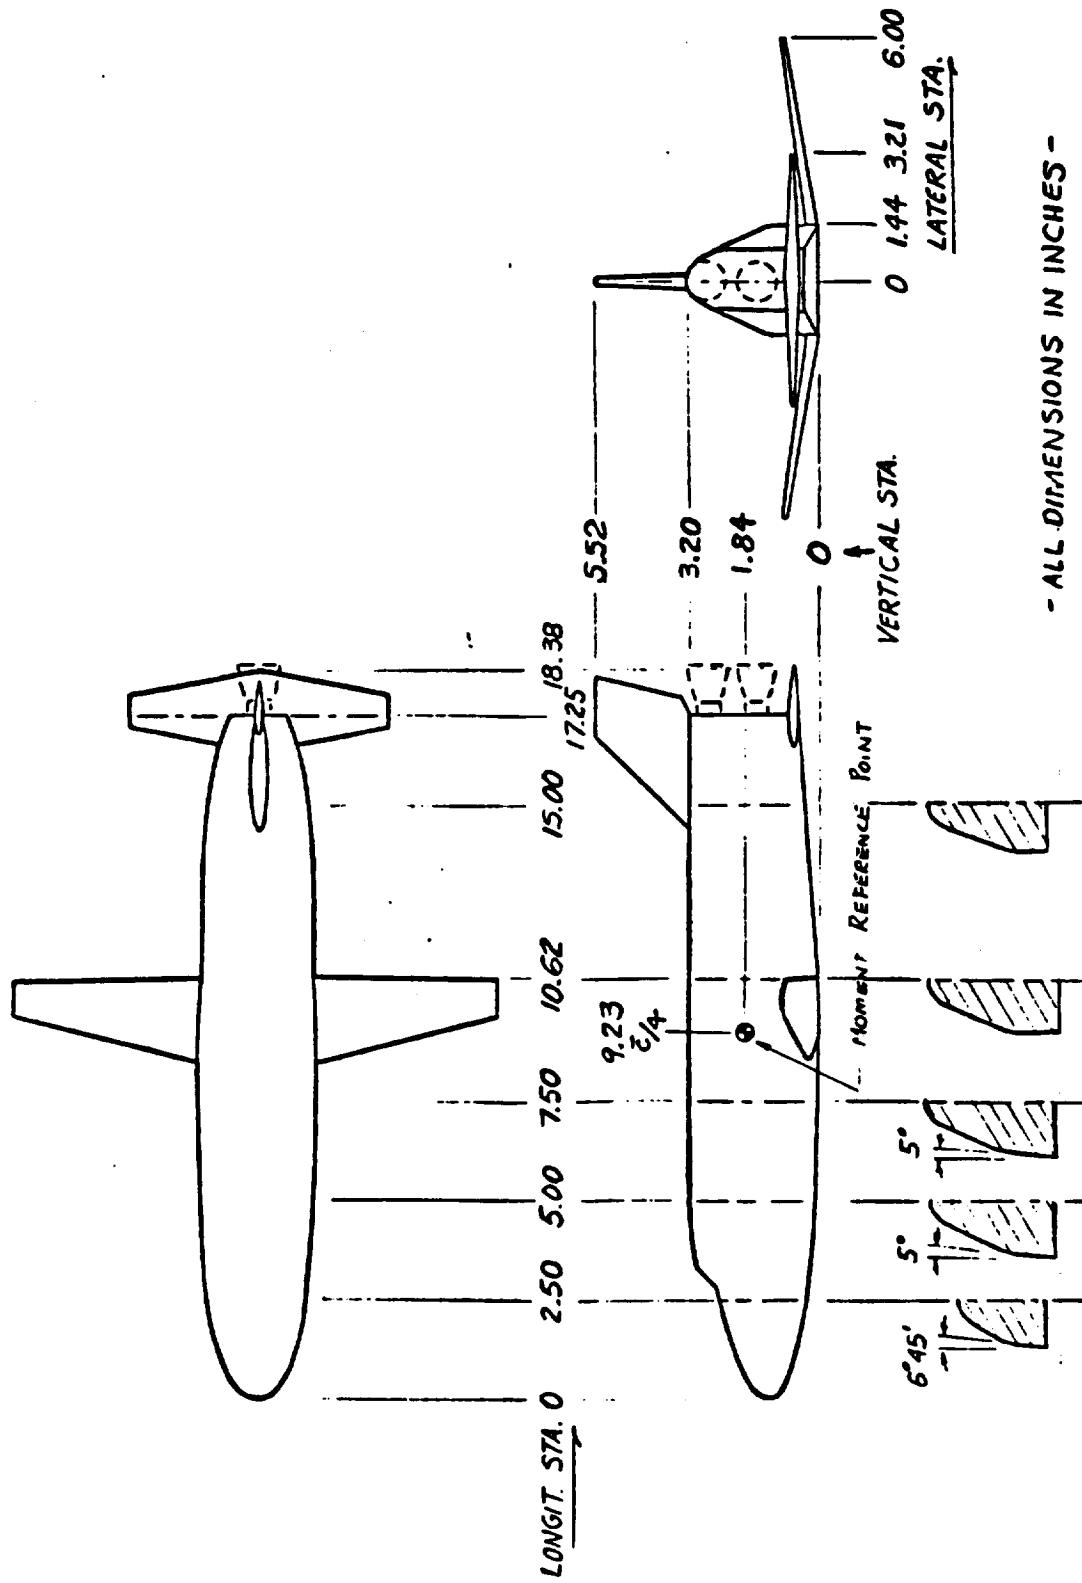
ASSEMBLY DRAWING OF MSC ORBITER S-3
